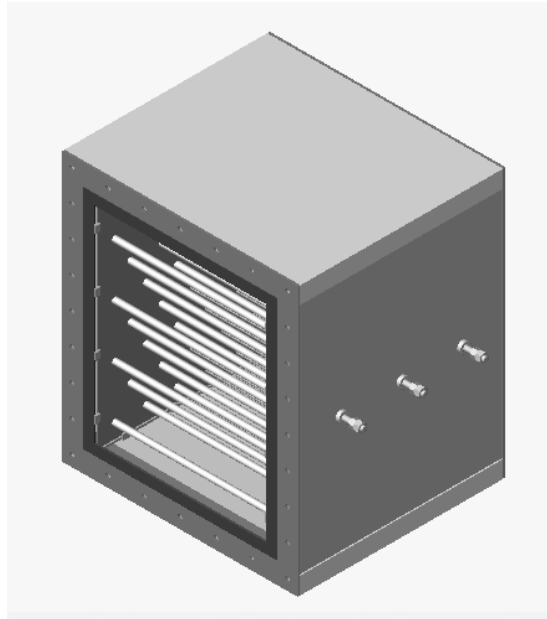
Orientated PBMM heater cassette assembly illustrating, e.g. external electrical connectors and heater element insulation tubes. Spirally wound heater elements are not shown.
